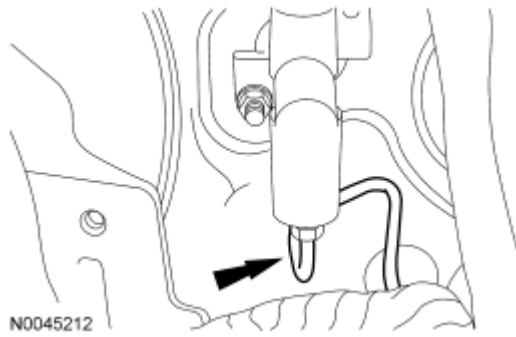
Locating Clutch Master Cylinder-To-Clutch Slave Cylinder Hydraulic Line
